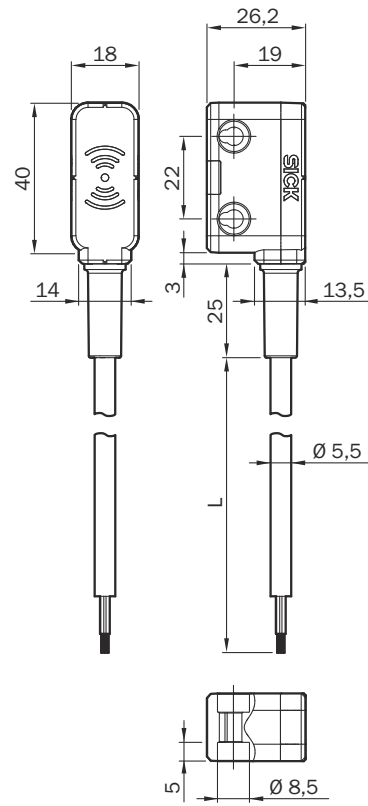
Dimensional drawing for STR1 sensor with flying leads
